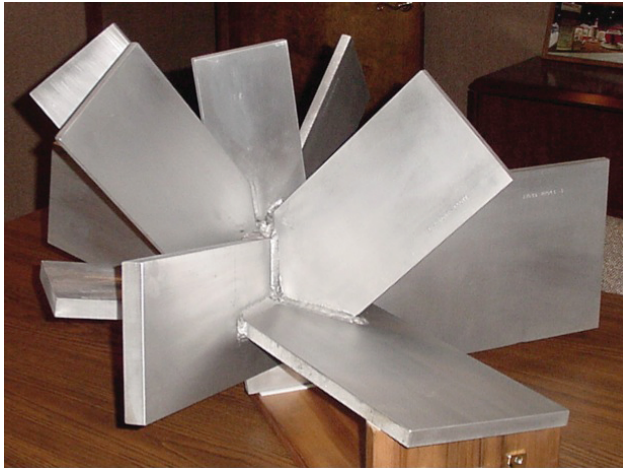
Typical backstructure node formed from aluminum plates welded together in a complex fixture.
